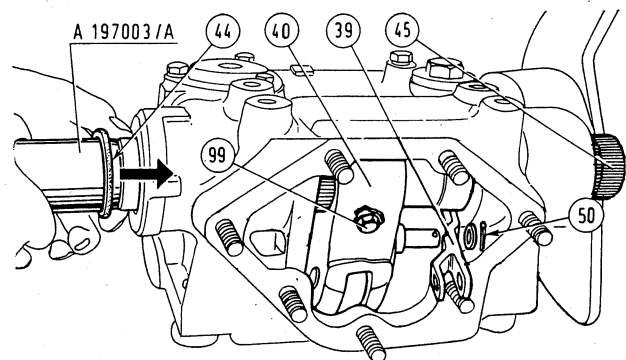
Removing the rocker shaft from the hydraulic lift unit.
